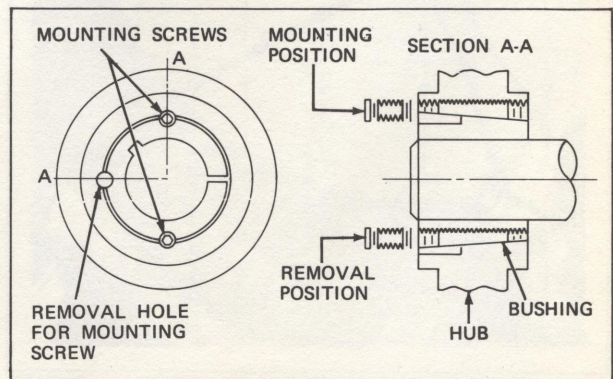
TAPER LOCK HUB AND BUSHING.
